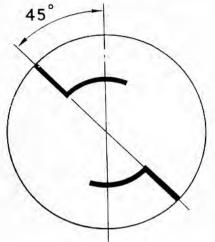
ARRANGE-MENT OF STARTER JAW FOR BEST CRANKING POSITION
